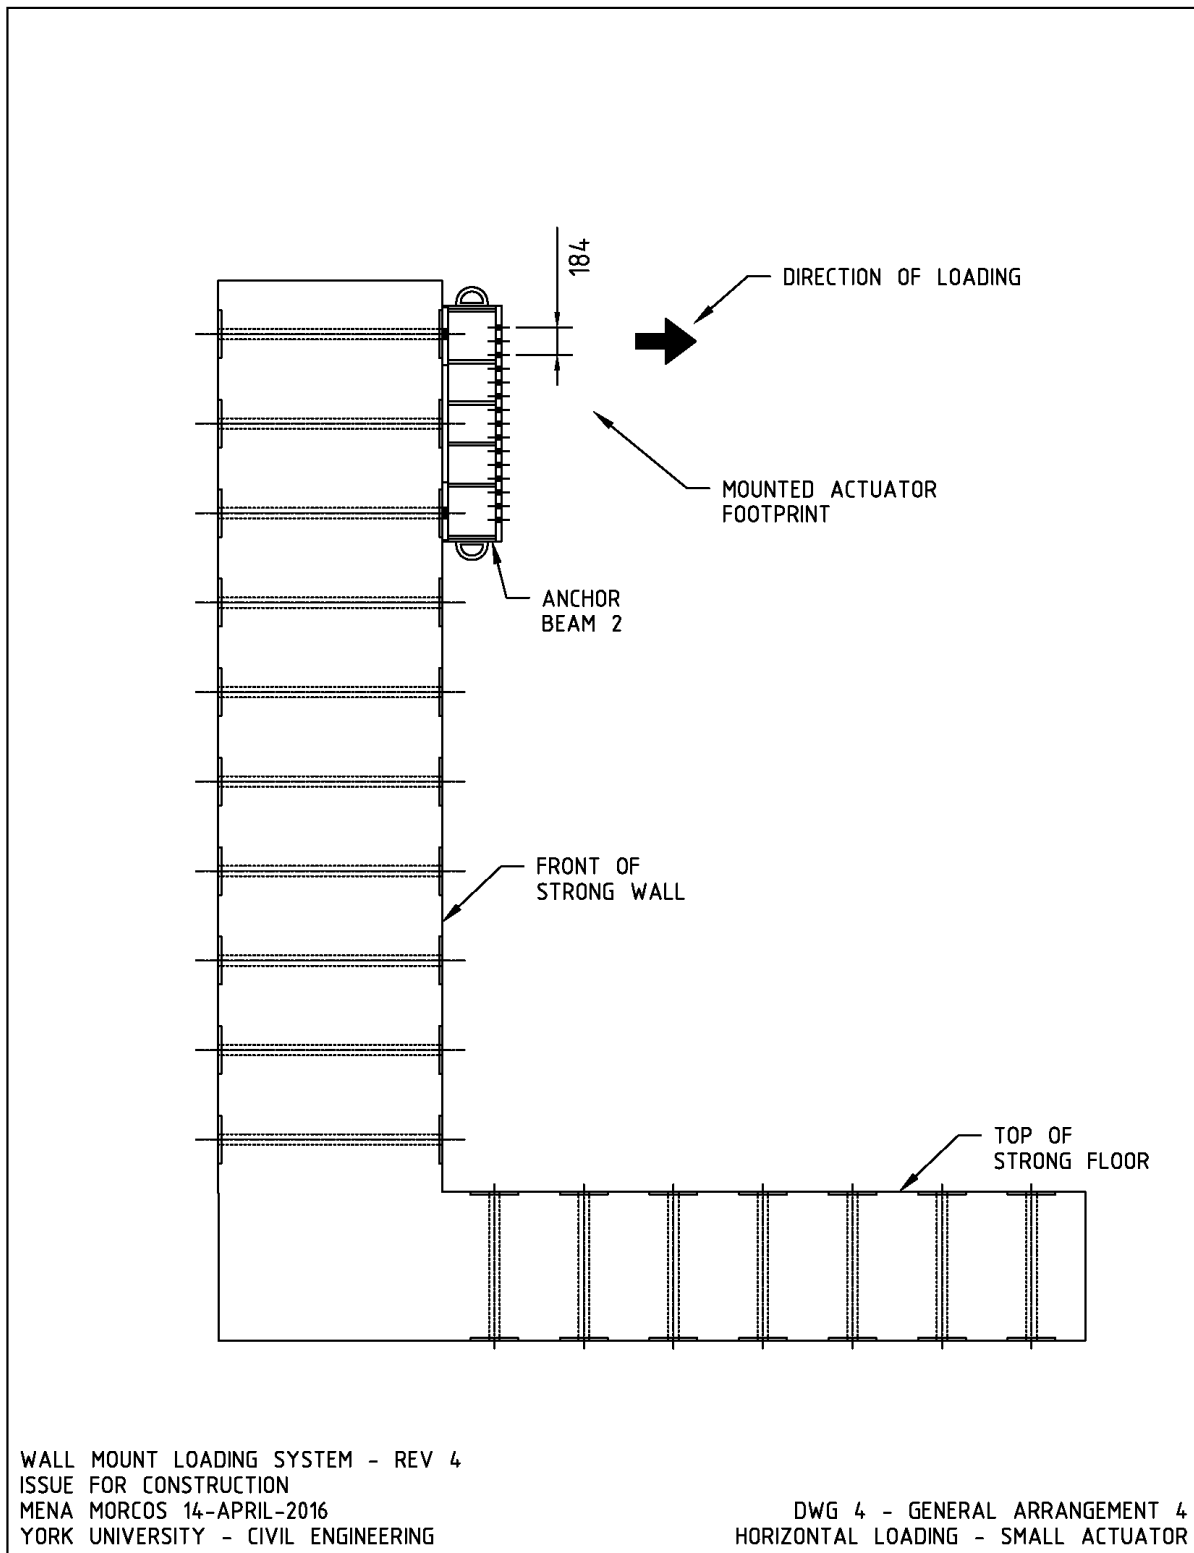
Wall mount loading system design and fabrication drawing – Drawing 4.
